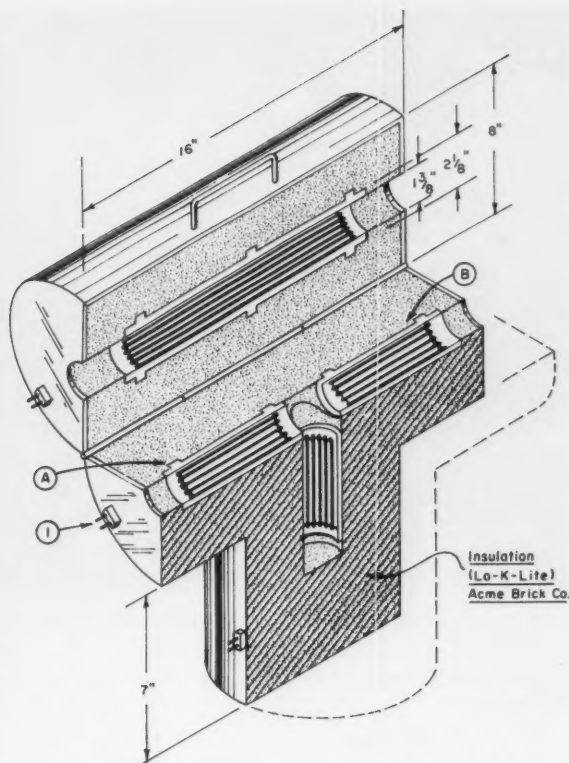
Modified combustion furnace of standard Hoskins laboratory tube type.
